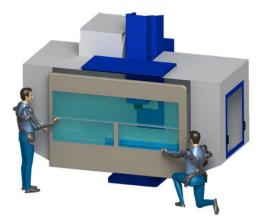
Exoskeleton assisted machine building - SHERLOCK vision.
